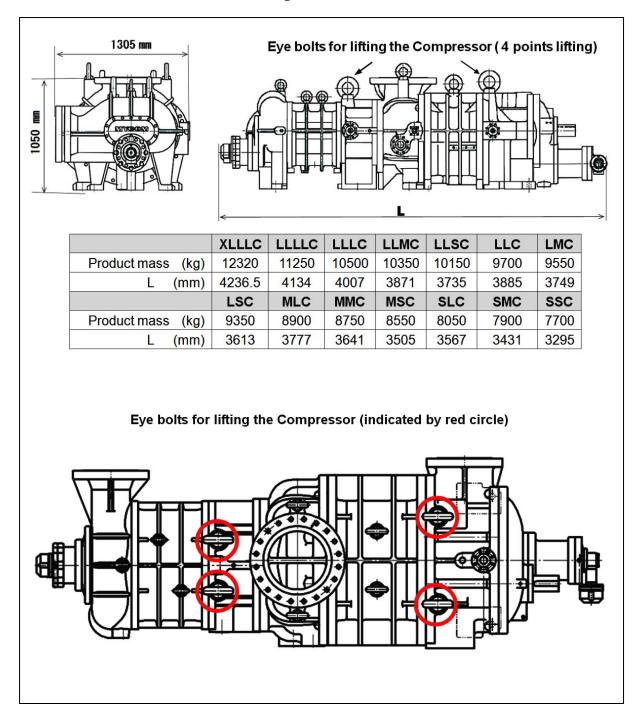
Outer Dimensions, Mass and Lifting Position of Compressor
